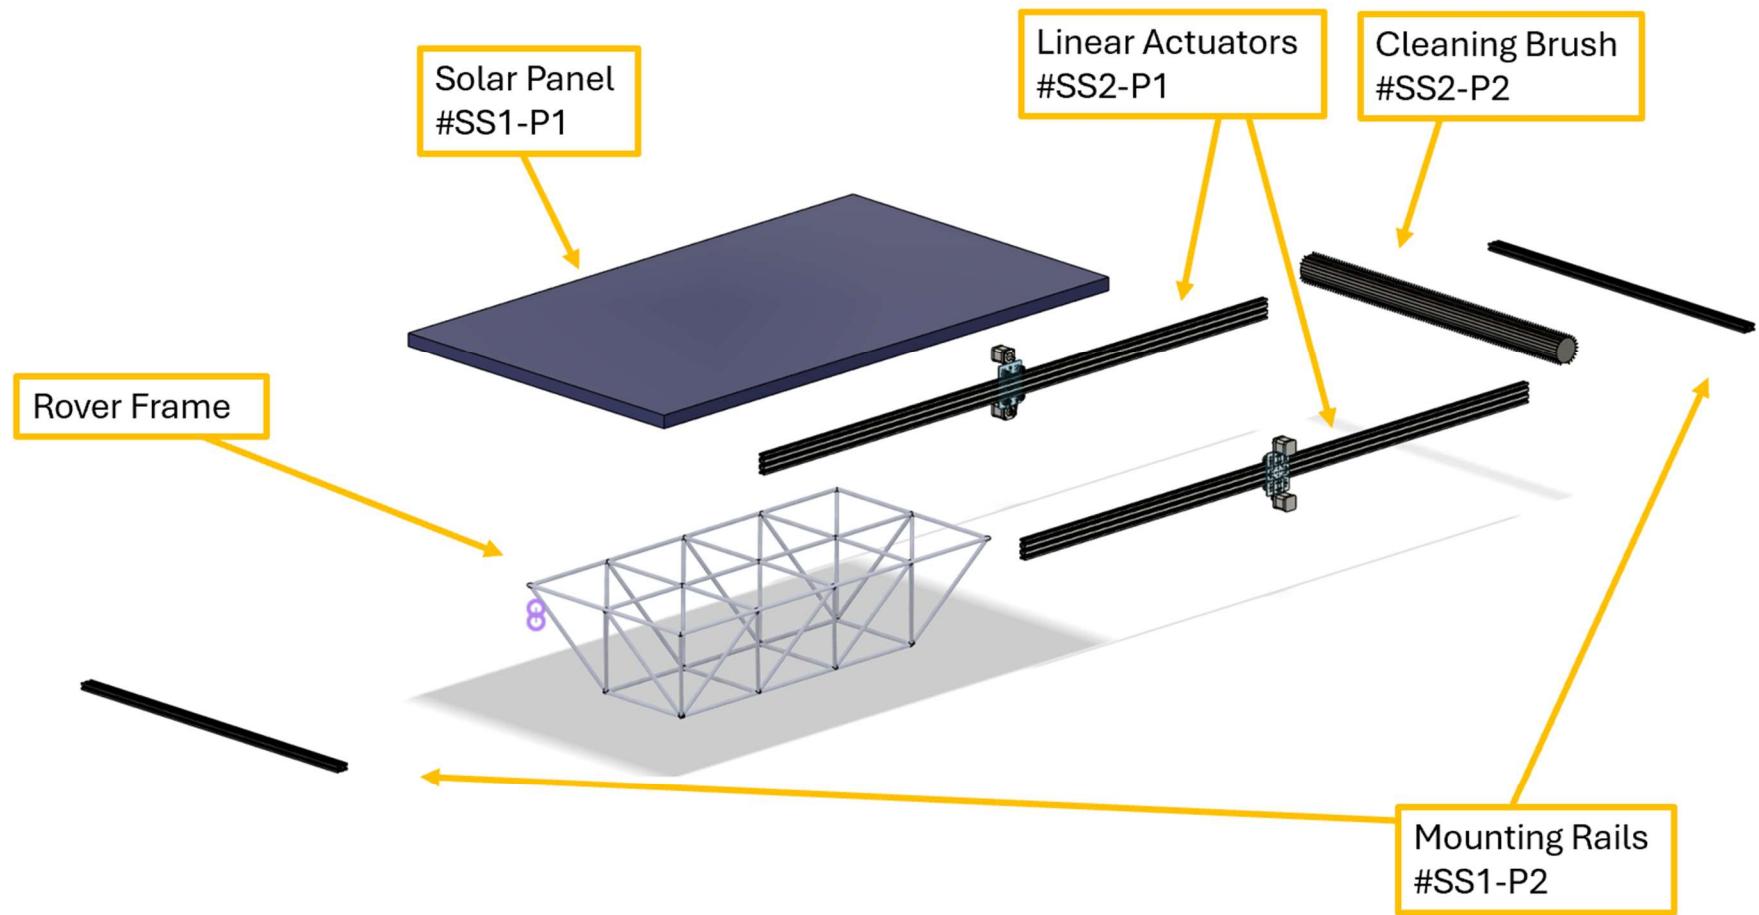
Exploded View Assembly Drawing of Sub-System SS#1&2-The Overall System
